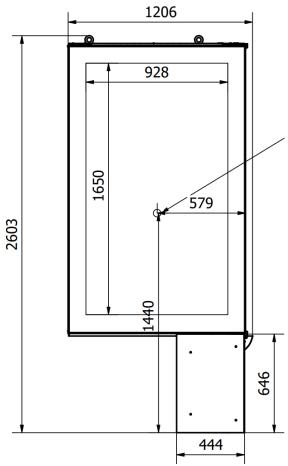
(above) Elevation plan of the main charging unit with integrated digital signage panel. Source: JOLT (2025).
